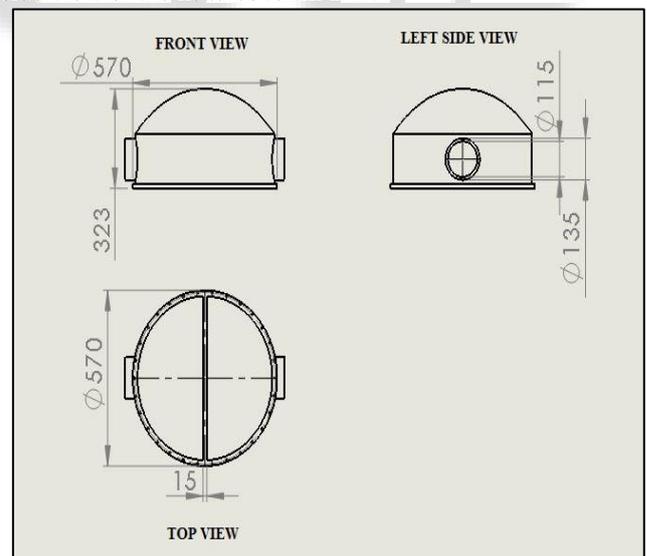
2-D Front view, Top view and Left side view of the head cover
